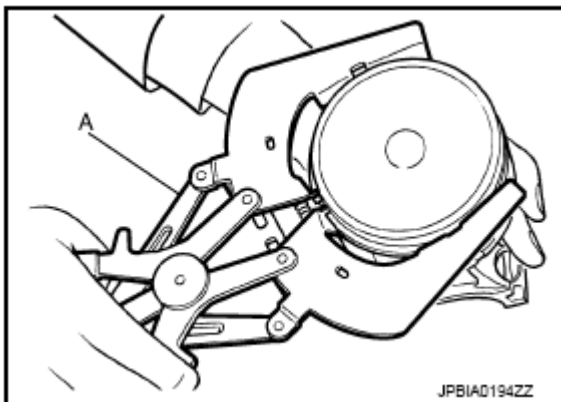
Removing Piston Rings From Piston Using Piston Ring Expander
